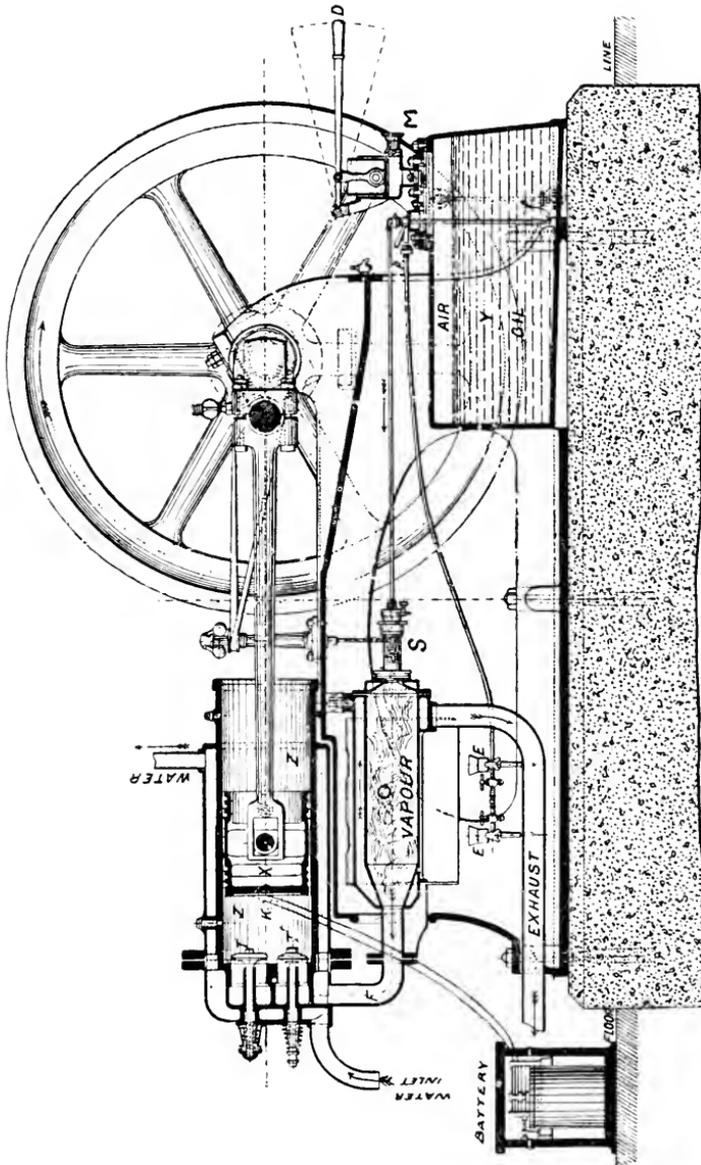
SECTION OF PRIESTMAN'S OIL ENGINE.
